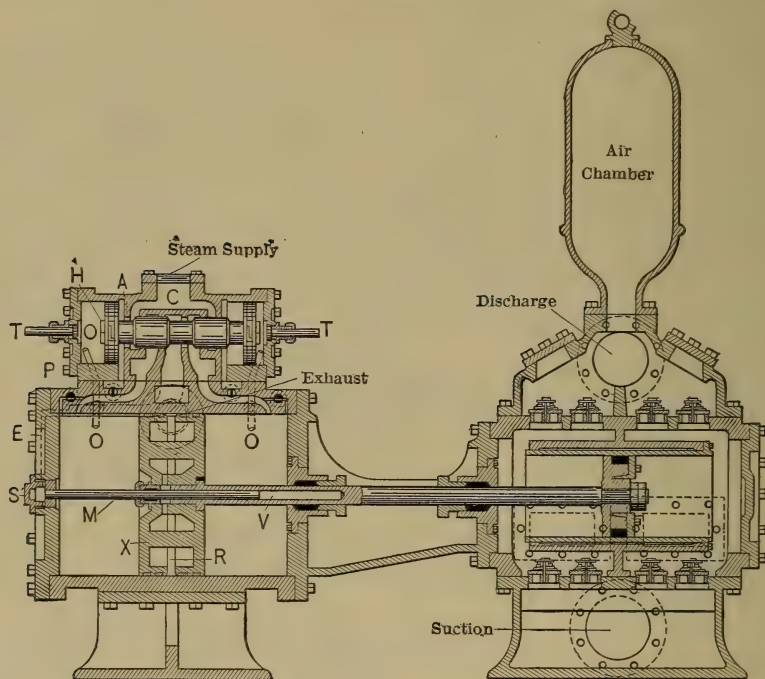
Marsh Boiler-feed Pump. A Typical Steam-actuated Valve Gear.
